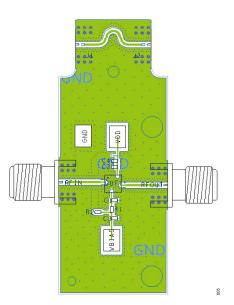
ADL8102-EVALZ Assembly Drawing (J1 and J2 Are Not Installed)
